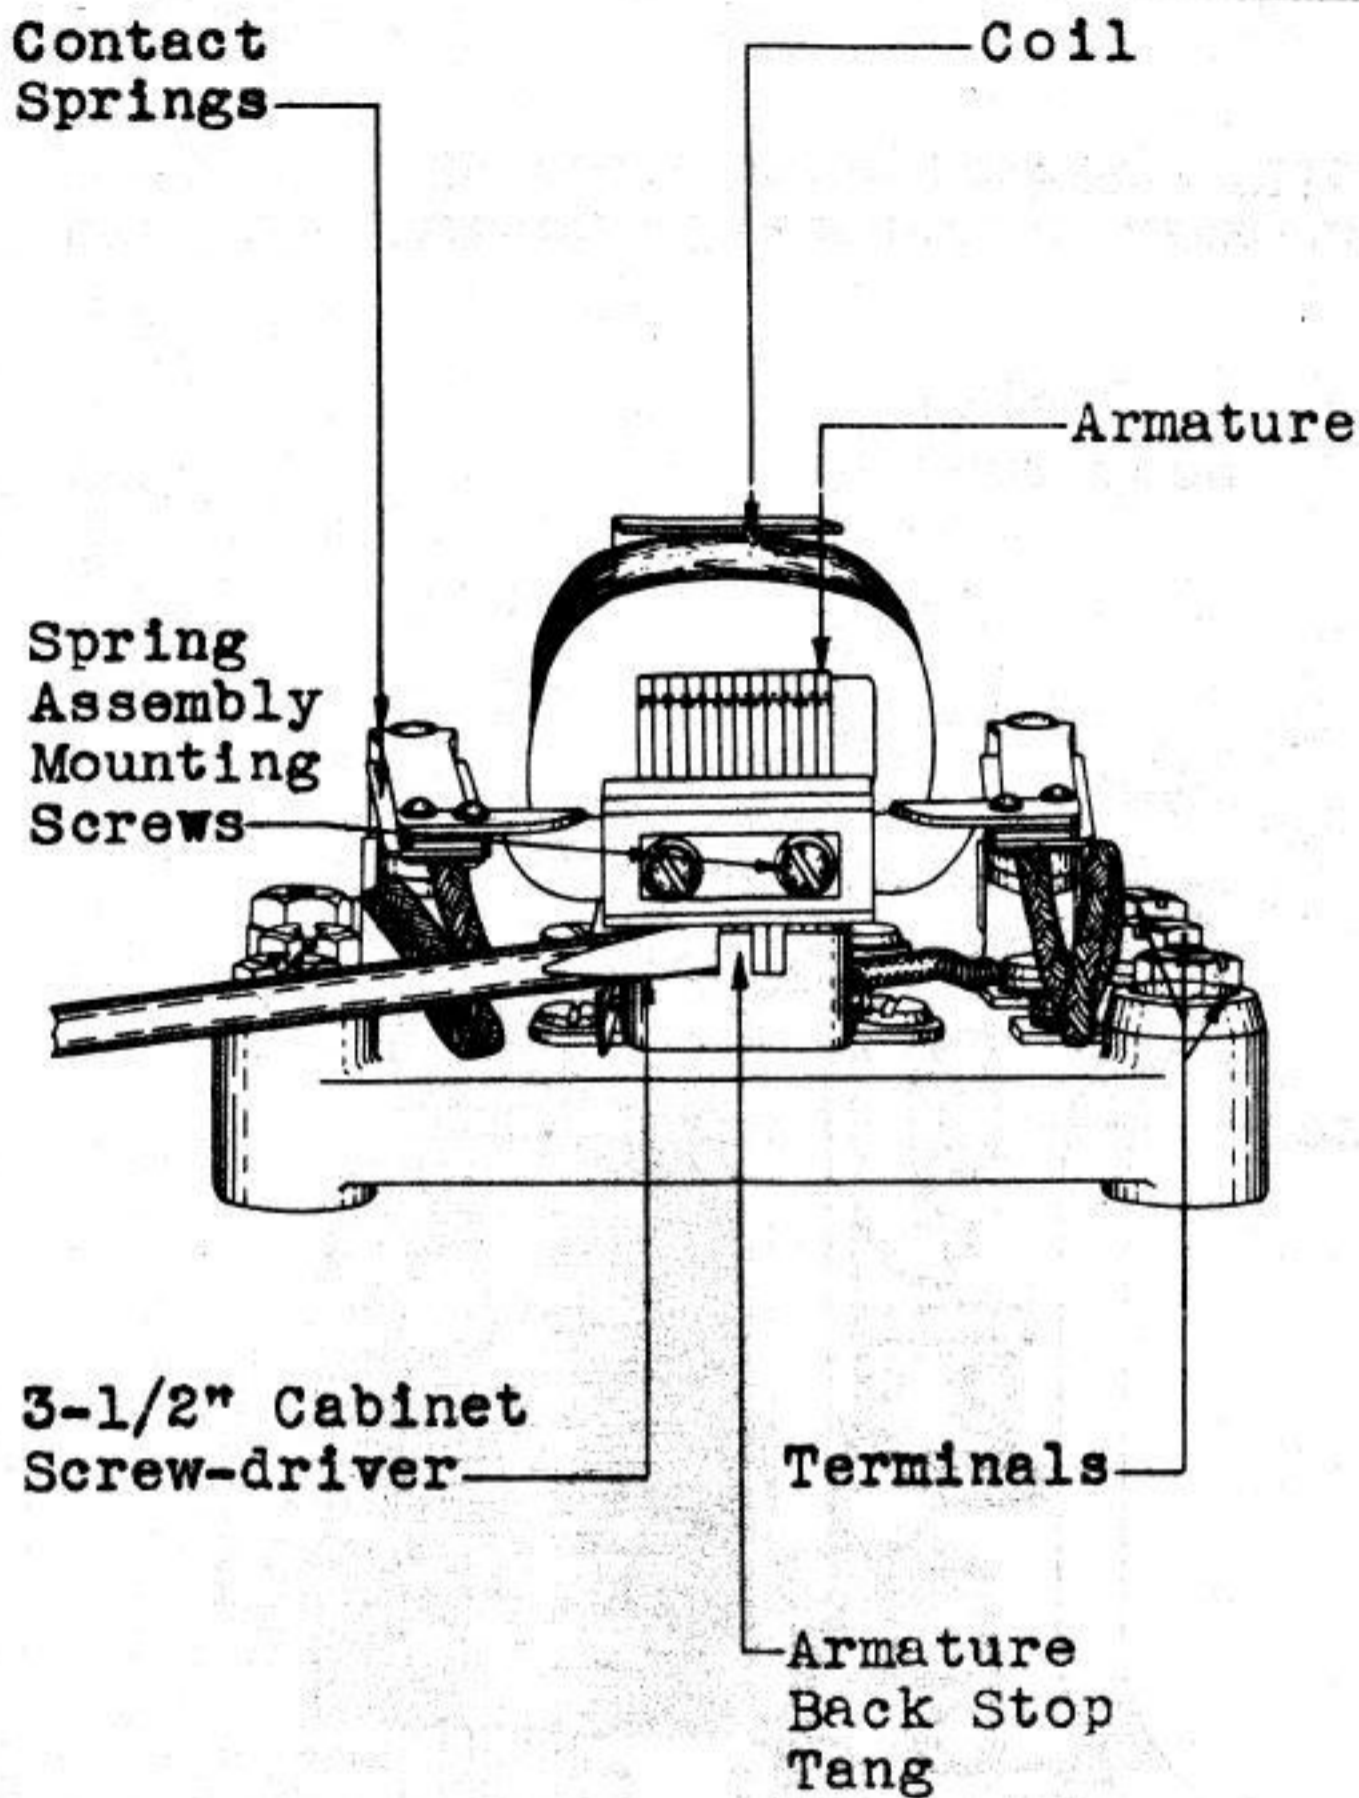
Method of Adjusting Armature Back Stop Tang, Using 3-1/2" Cabinet Screw-driver
